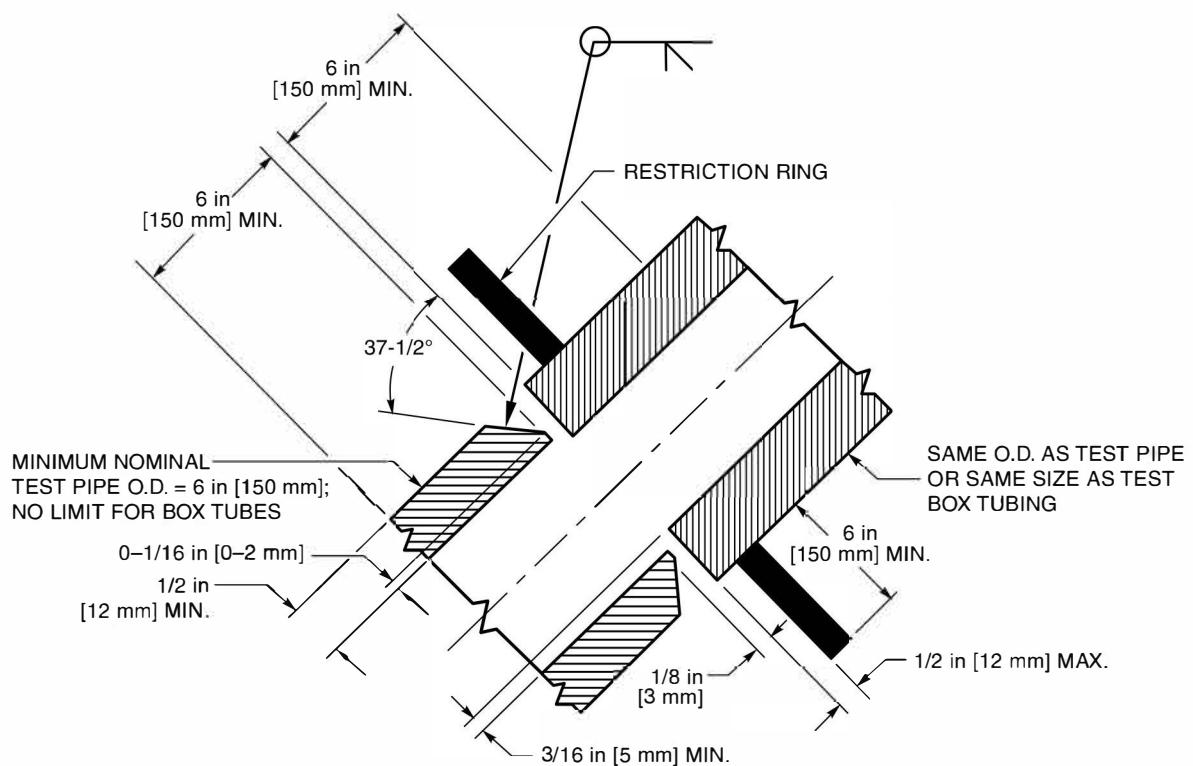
Test Joint for T-, Y-, and K-Connections without Backing on Pipe or Box Tubing (≥ 6 in [150 mm] O.D.)—Welder and WPS Qualification (see [10.14.4.1](#) and [10.18](#))
